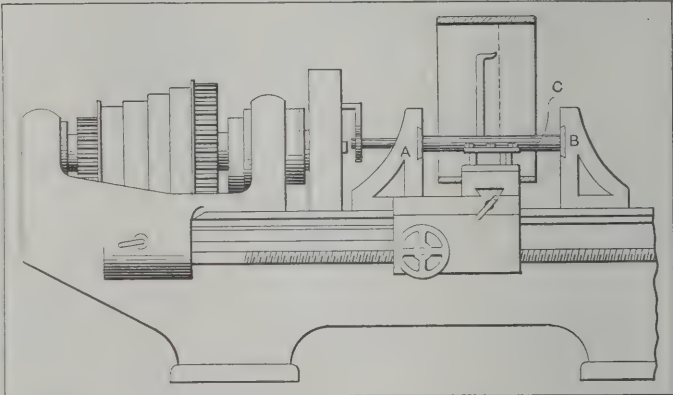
Device for Boring Elliptical Holes in Place on the Lathe
